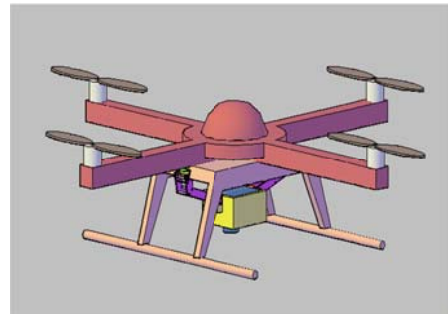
3D view of brackets with fasteners attached with RC Quadcopter.
